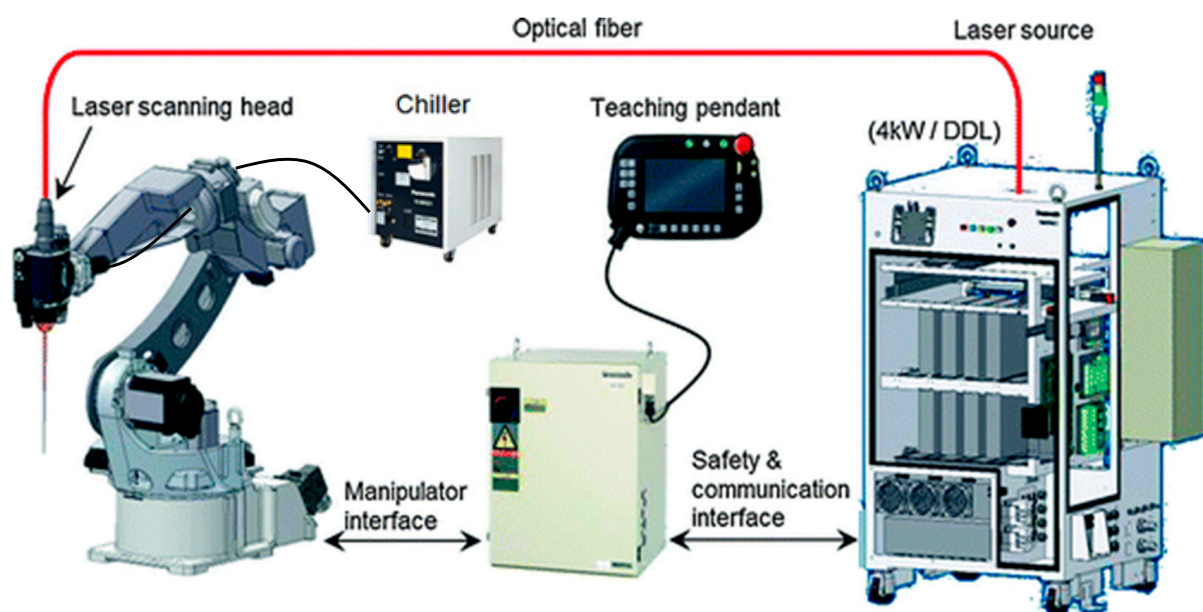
Schematic diagram of a remote laser welding system (source: Orion Automation, accessed on 1 October 2022). (<https://www.industrysearch.com.au/panasonic-robot-welding-systems-robot-laser-welding/p/149654>).
